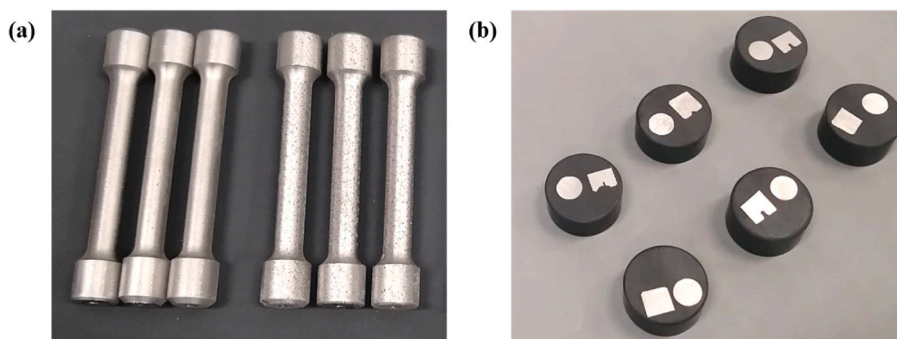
Tensile specimens; (b) cross-sectional mounted specimens.
